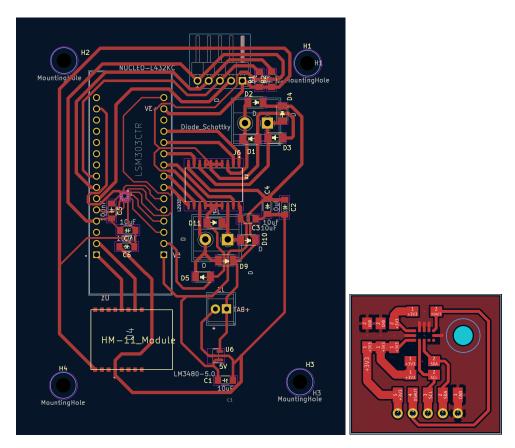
Completed PCB layout (copper fill removed from image) $\,$
